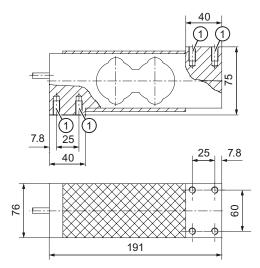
SIWAREX WL260 SP-S AB dimension drawing
